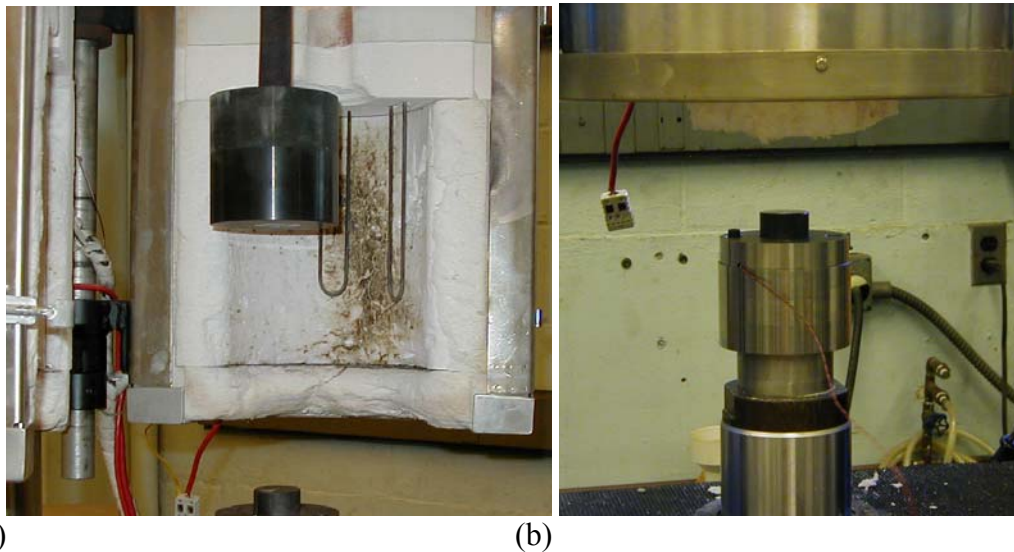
a) Waspaloy billet mounted to press top bed b) assembled instrumented test container mounted to the press ram (bottom bed)
